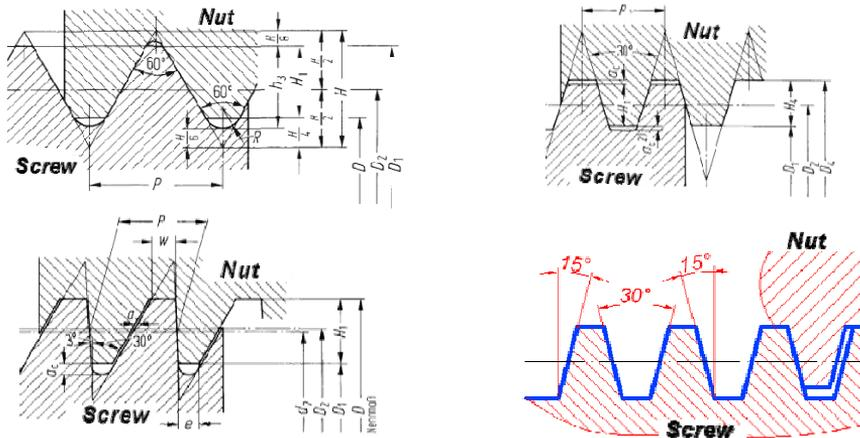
Different thread profiles a) V thread b) Acme thread c) Buttress thread d) New thread
